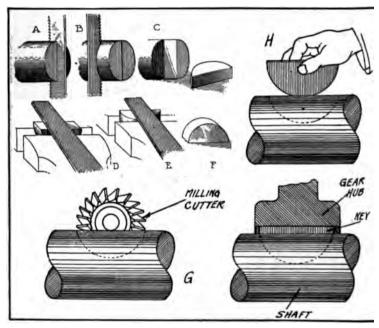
How to Make a Woodruff Key, Cut the Keyway and Method of Using.
